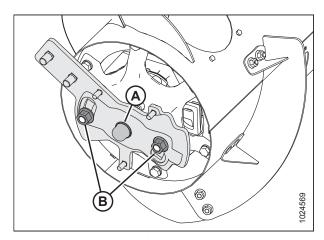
Right End of Feed Auger with Cap Cover Removed
